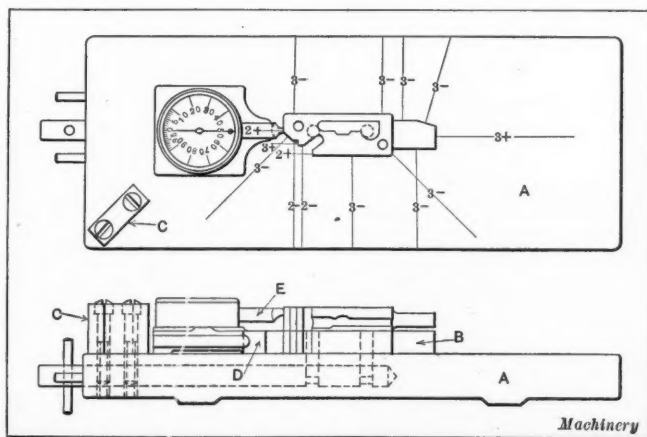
Dial Indicator for inspecting Irregular Work on the Ordinate Principle
